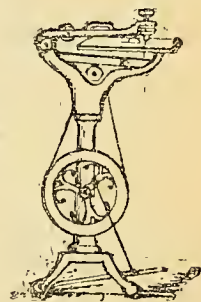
LEWIS'S NEW FRET MACHINE.
